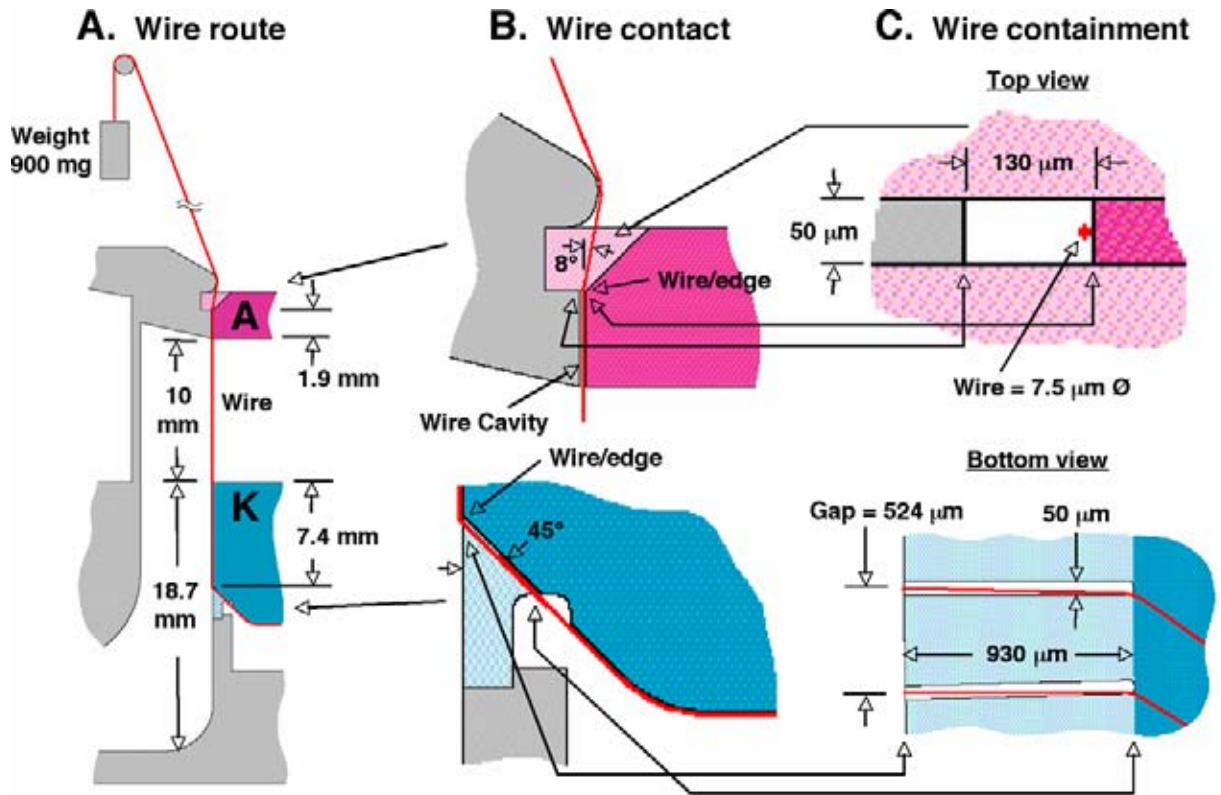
Typical wire array fixture showing (A) wire route, (B) wire contact points, and (C) wire containment slots.
